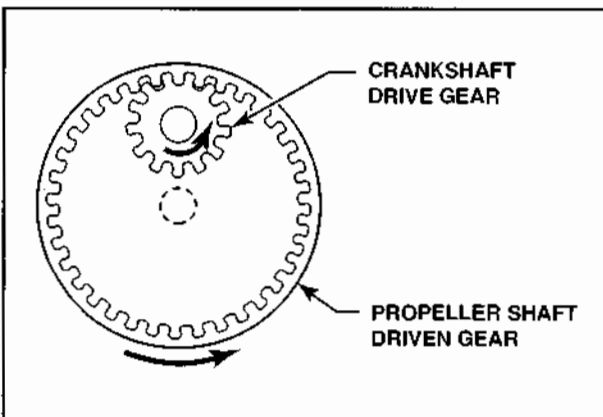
A gear reduction system with one internal-tooth gear and one external-tooth gear turns the propeller and crankshaft in the same direction and is more closely aligned than a reduction system with two external-tooth gears.
